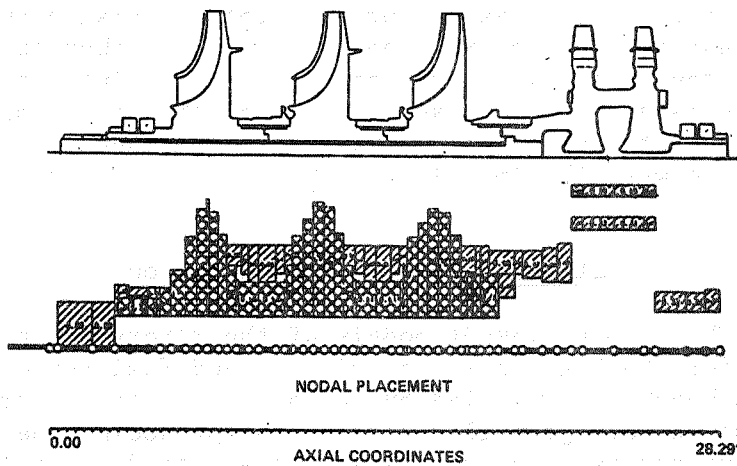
SSME HPFTP Rotating Assembly Finite Element Model
